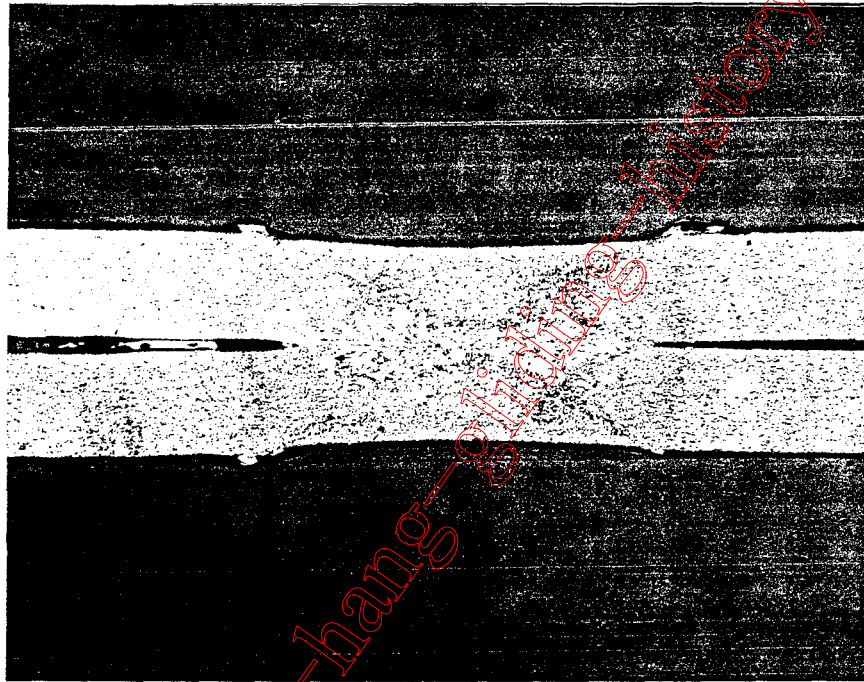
Typical Spot Weld in Foreign Flex Wing Assembly. Mag. 50x. Fry's Reagent Etch.
